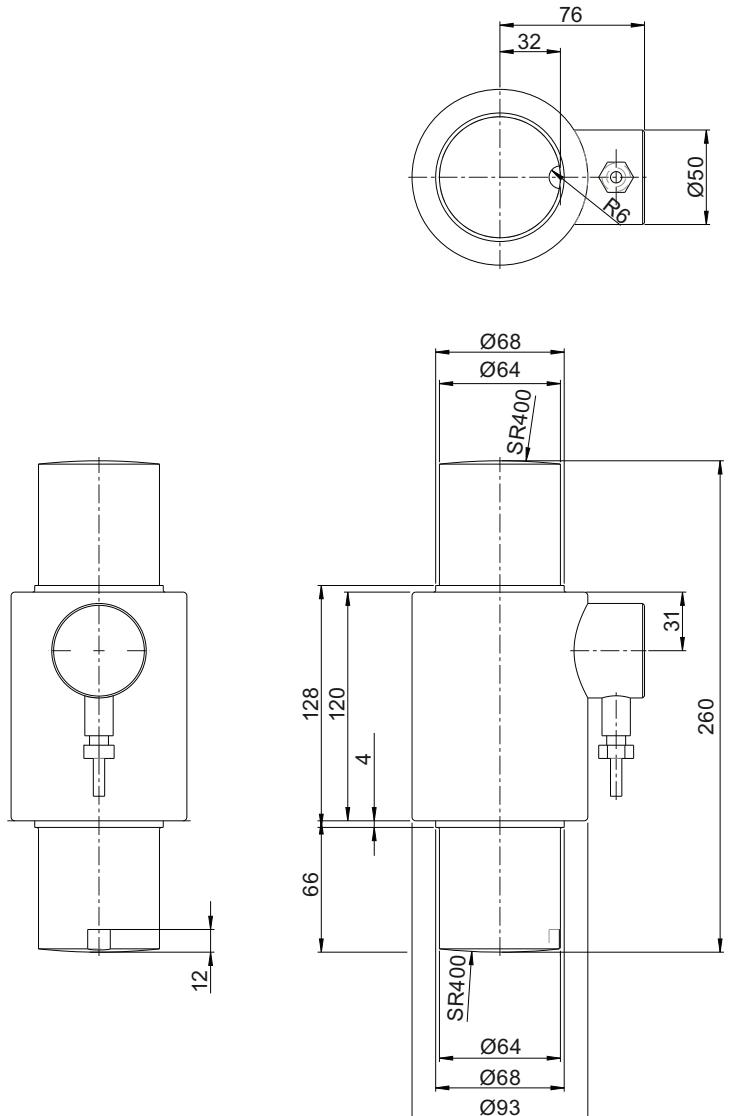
SIWAREX WL270 CP-S SB dimension drawing
